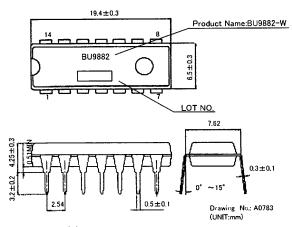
(a) PHYSICAL DIMENSION DIP14 (BU9882-W)
